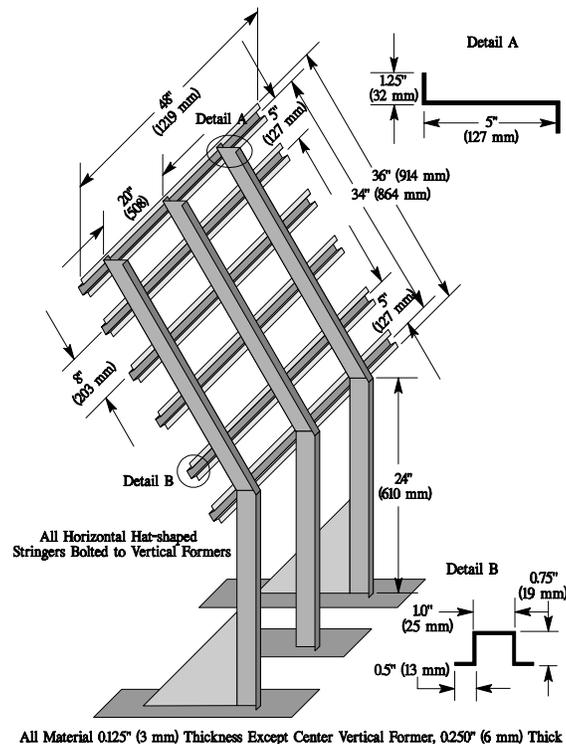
BURNTHROUGH TEST APPARATUS SPECIMEN HOLDER
